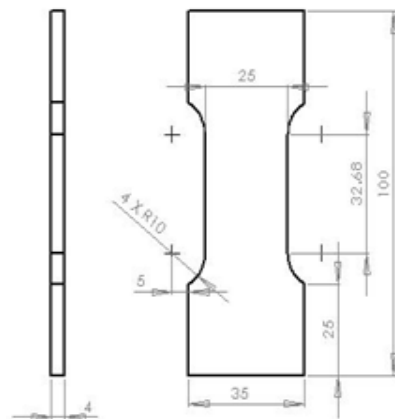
Dimensions of the tensile test were prepared using a 3D printer
